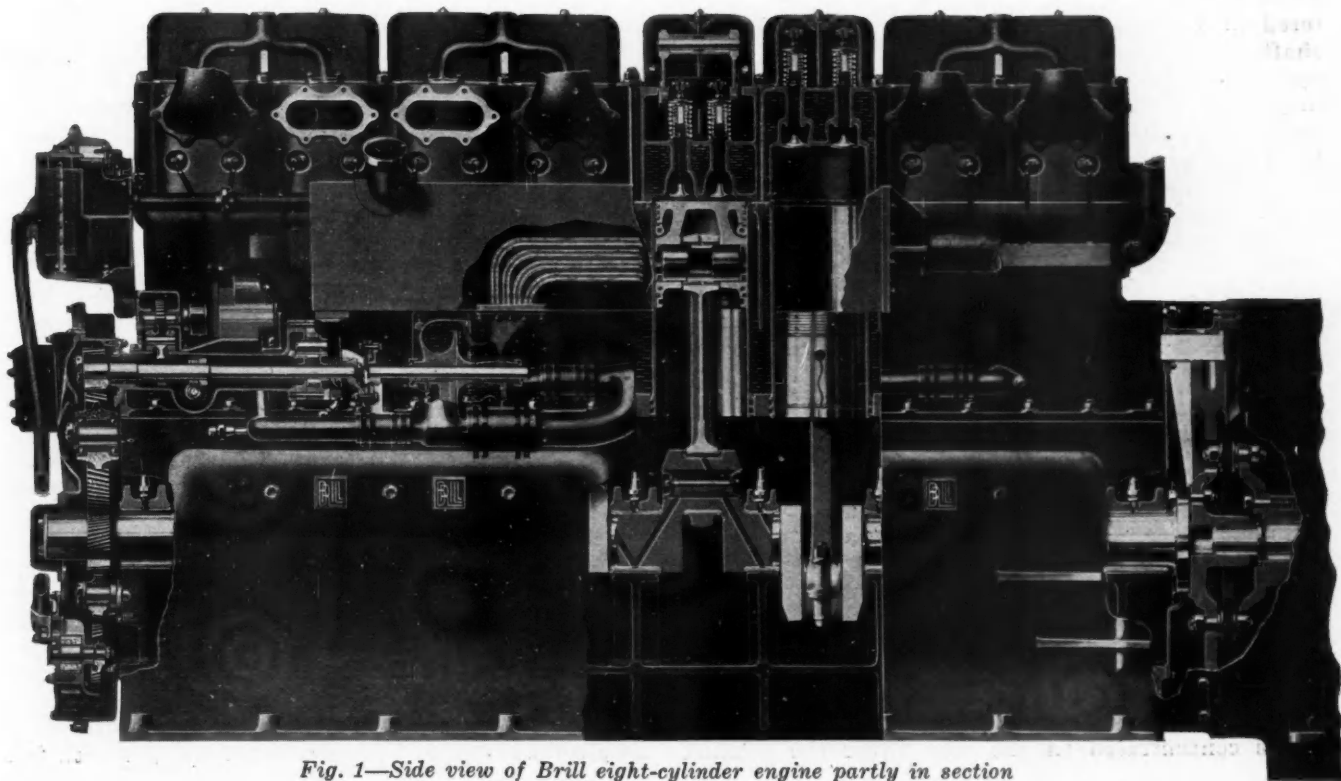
Side view of Brill eight-cylinder engine partly in section
